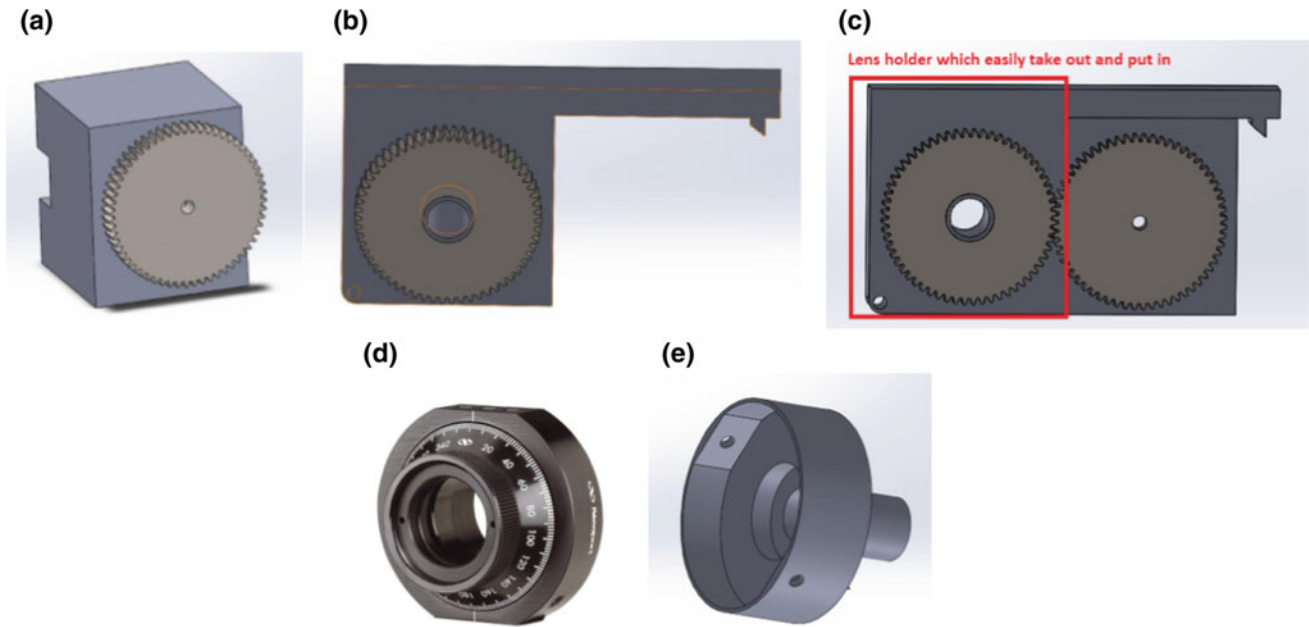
a Step motor jointing gear, b rotating hooker, c rotating polarizer block, d lens RM25A polarizer, e rotating polarizer holder
